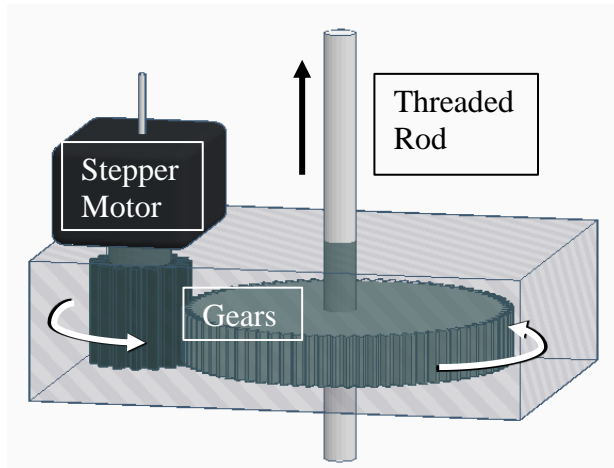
Diagram of the extruder showing the stepper motor, gear box, and threaded rod. The stepper motor drives the two gears which in turn move the rod in the vertical direction which pushed the piston of the extruder.
